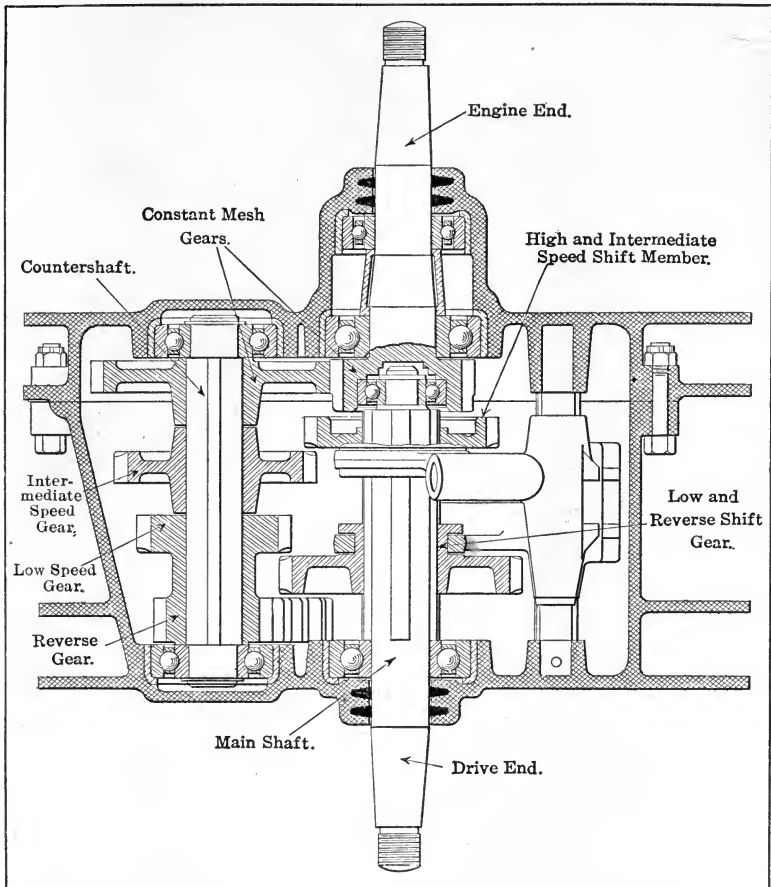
Showing Application of Two Shifting Members on Main Shaft of Selective Sliding Gear Speed-Changing Mechanism.
